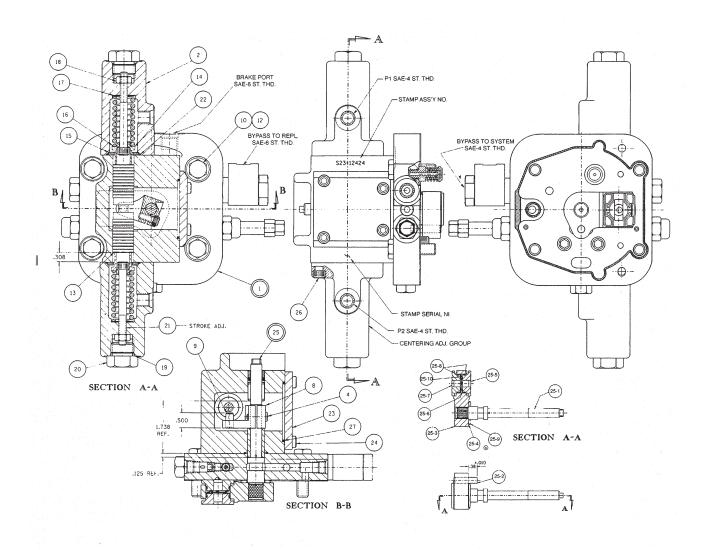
B HYDRAULIC STROKER WITH BRAKE AND BYPASS VALVE
